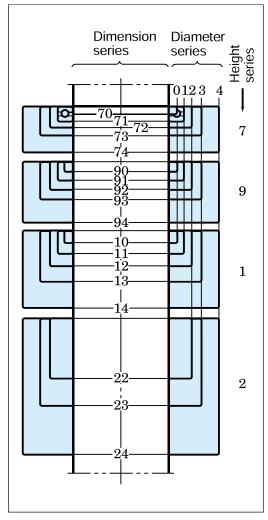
Thrust bearing dimension series diagram (diameter series 5 omitted)
